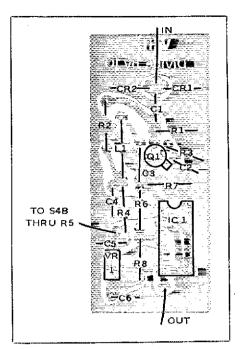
Parts placement guide for the vhf prescaler. The shaded area represents an X-ray view of the copper pattern. The etching pattern appears in the "Hints and Kinks" section of this issue. The board is double-sided copper clad, with all but a small strip etched away from the component side (see the photo and Fig. 3).
